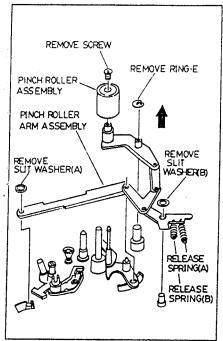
Pinch Roller Assembly and Pinch Roller Arm Assembly Removal
